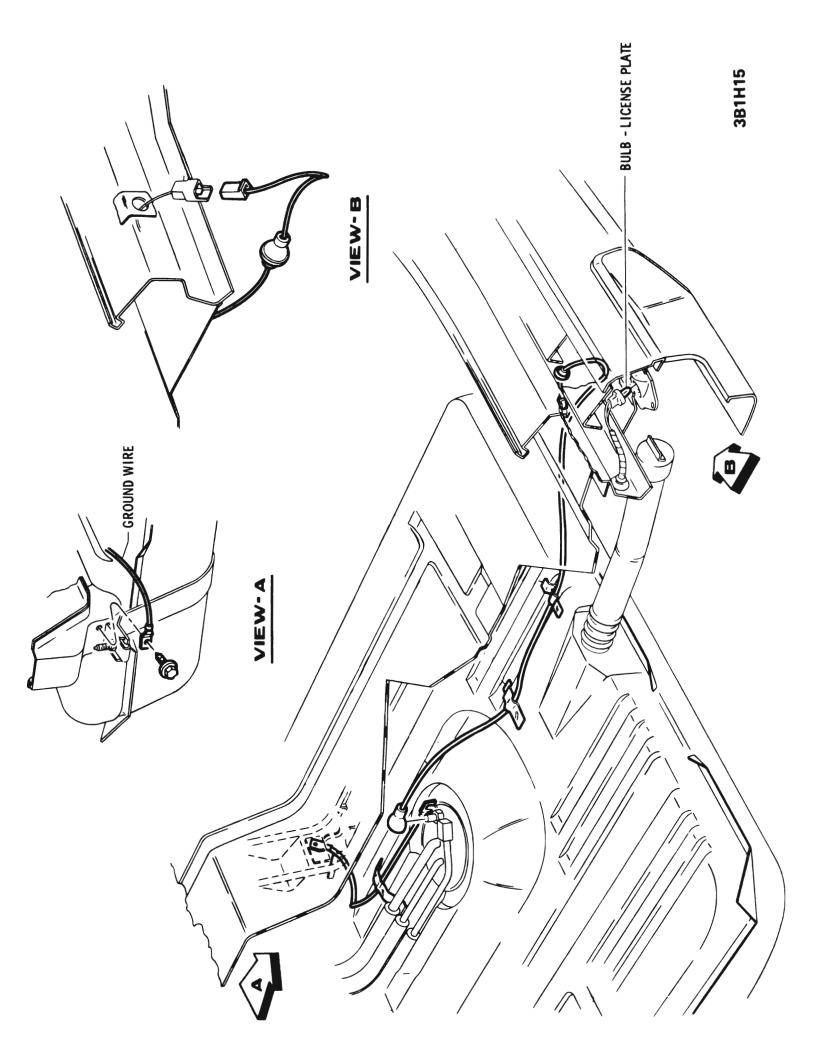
H-15 Rear Lamp and Fuel Gauge Wiring "A" Series
